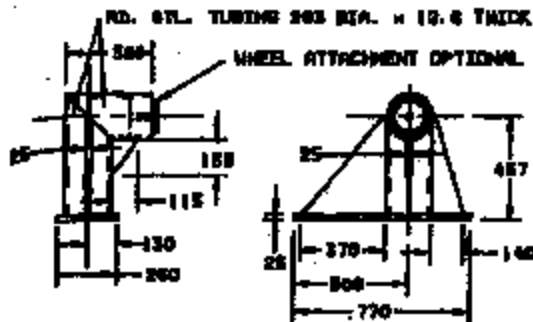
DETAIL OF WHEEL-HOLDING FIXTURE
